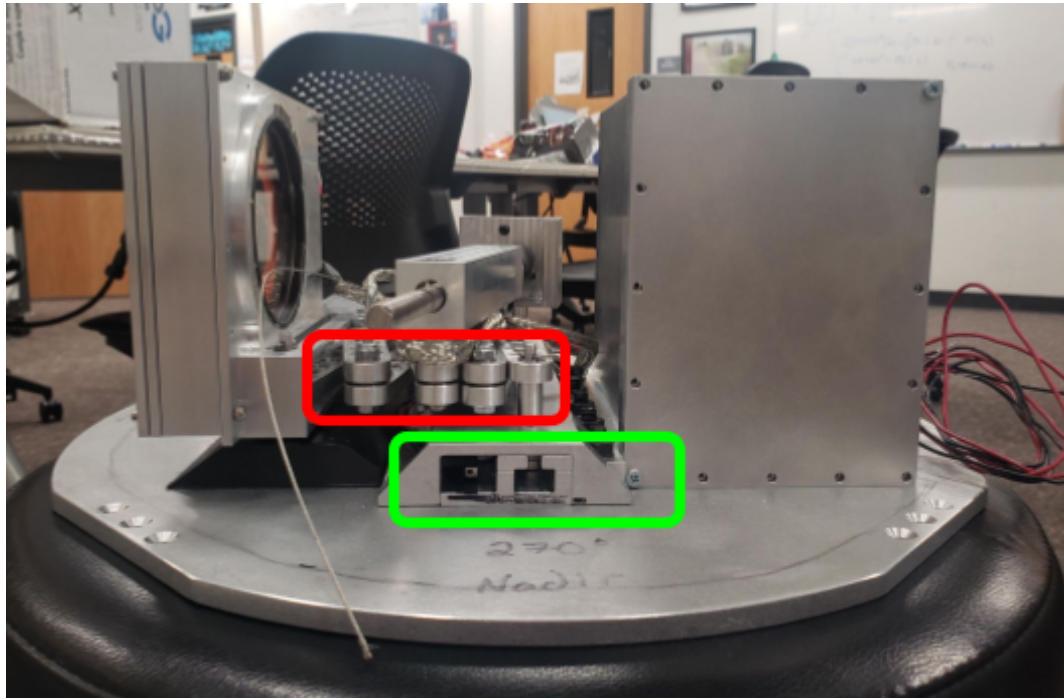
Side View of payload (Scissor arm spacing & Arm Base)
